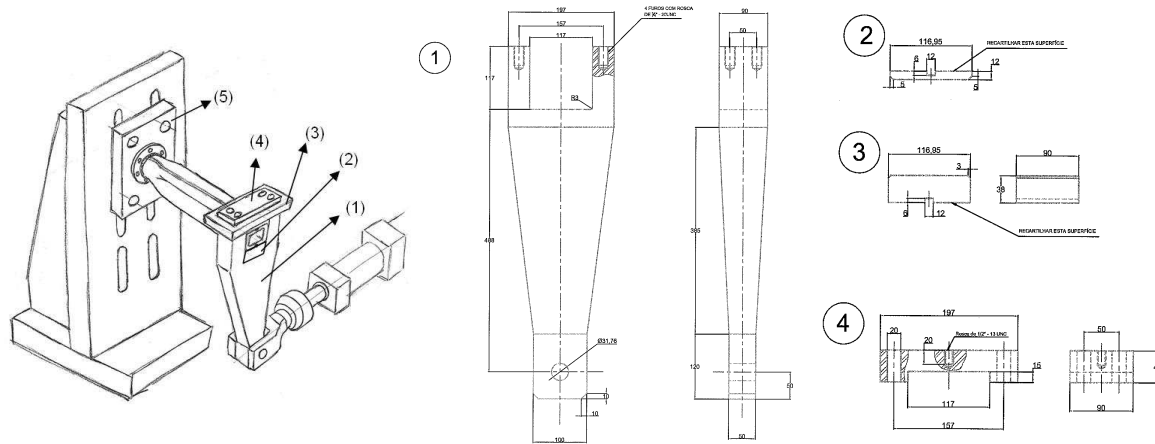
Test rig set up and fixtures sketches used to apply the combined in-phase bending and torsion loads.
